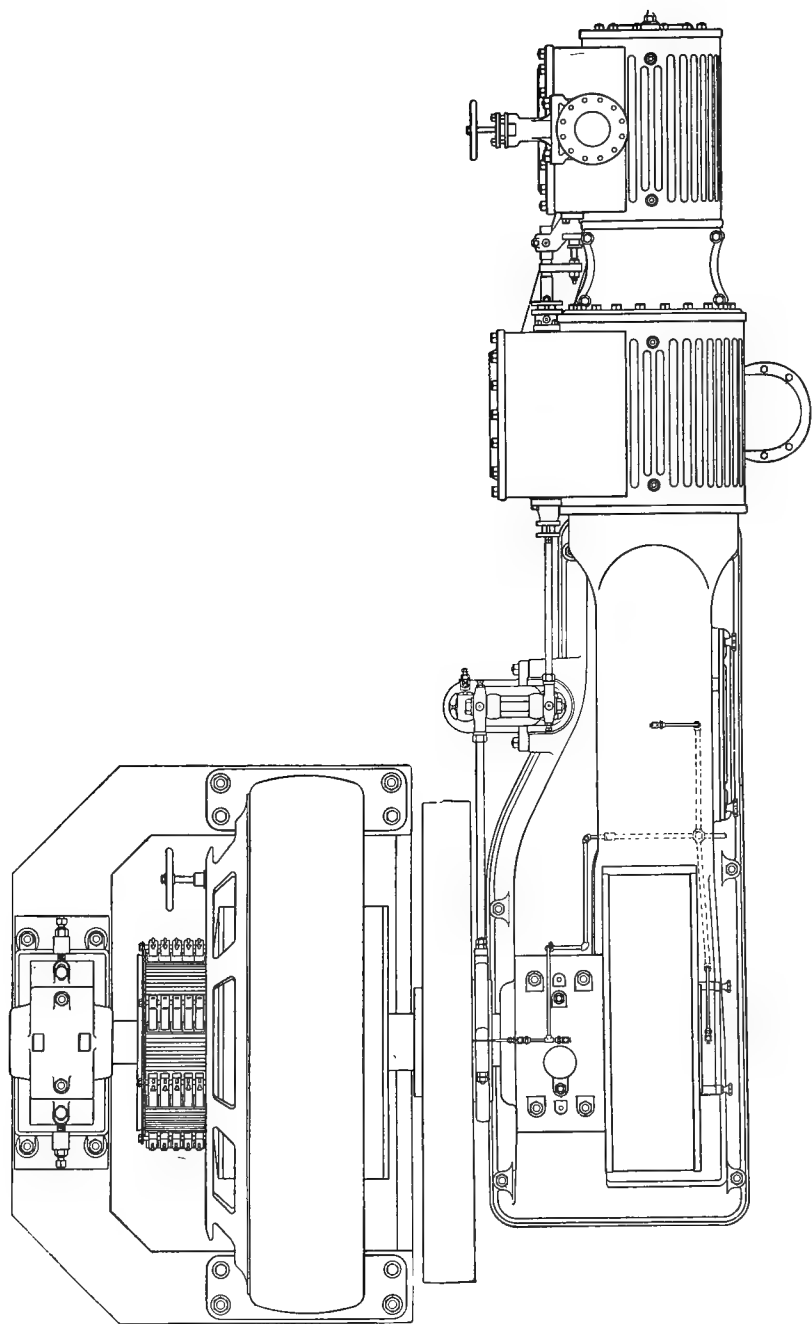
High-speed tandem compound engine, manufactured by the Ball Engine Company.
